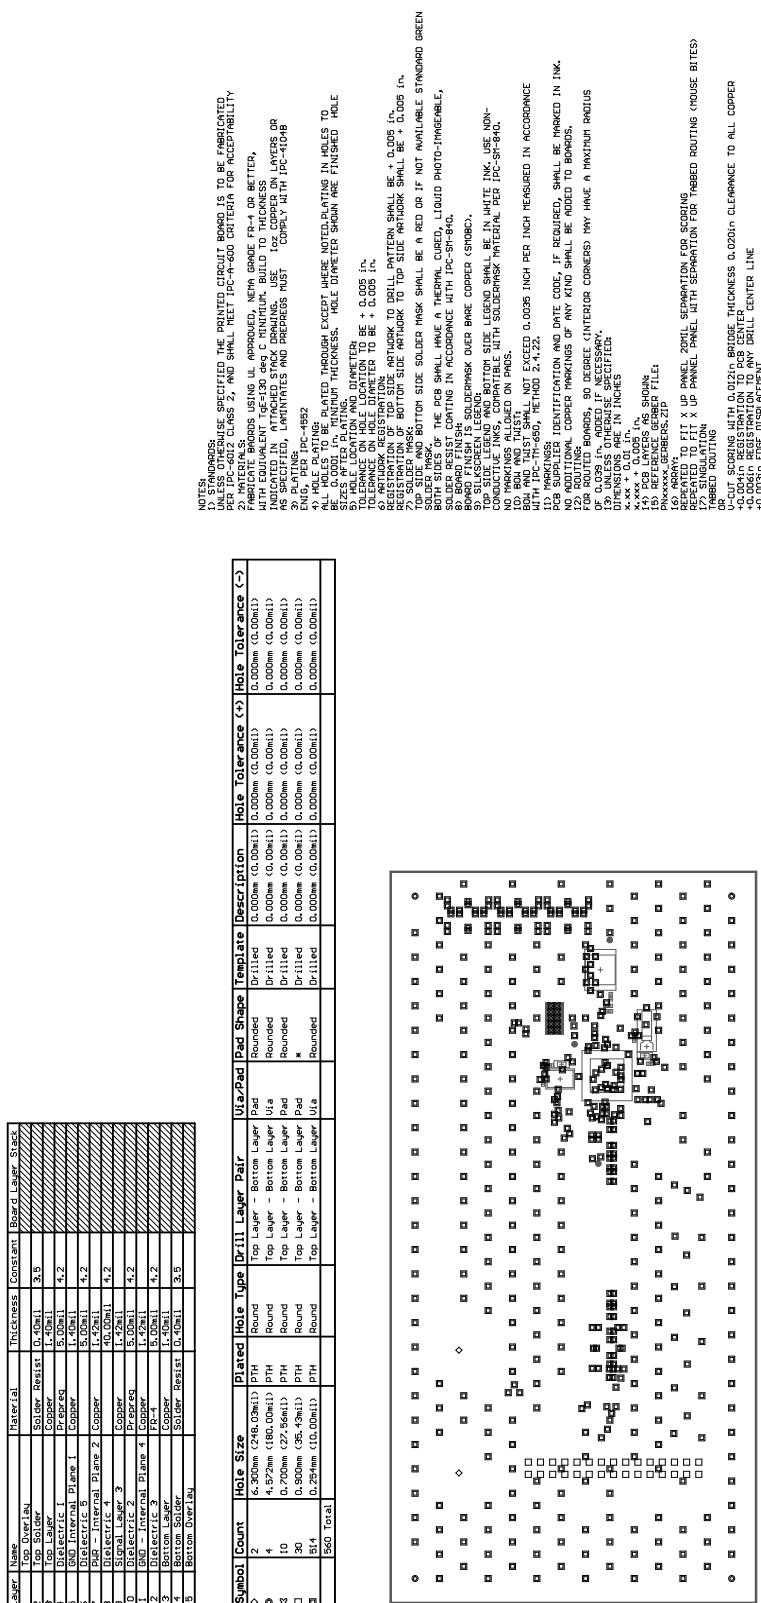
Embedded capacitance 6-layer version 3 design, mechanical drawing top.
